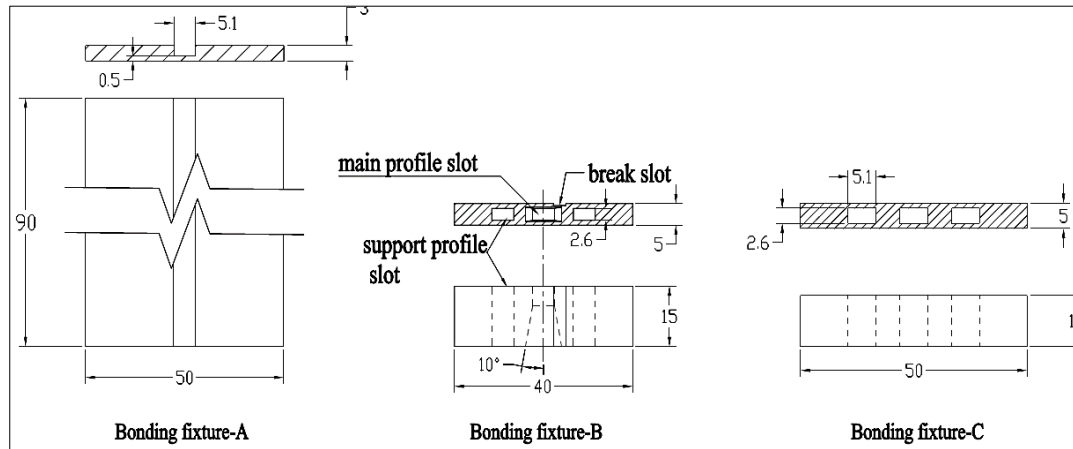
Bonding Fixture-A (left), Fixture-B (middle) and Fixture-C (right)
